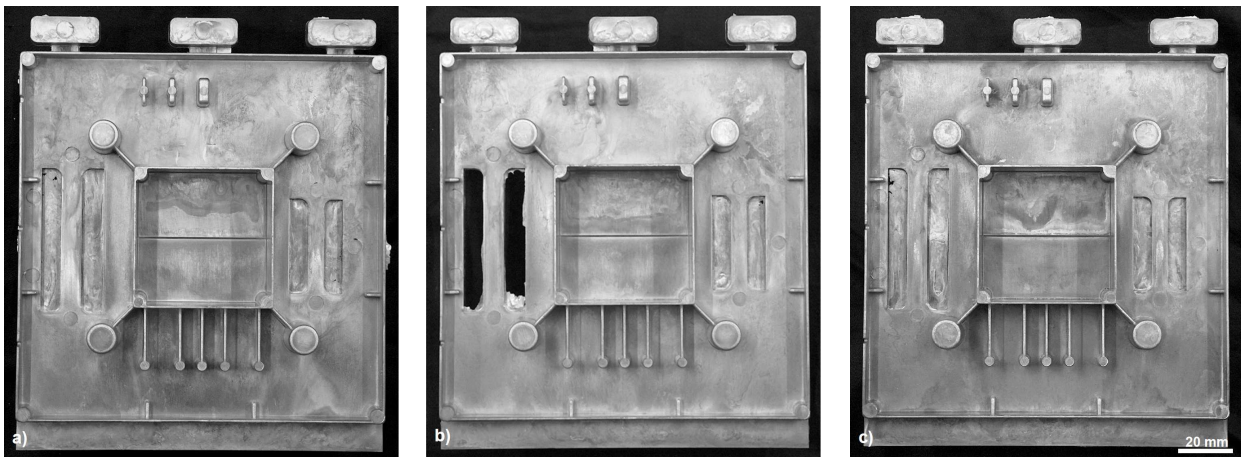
Examples of the best castings for (a) MRI153A (b) MRI153M and (c) MRI230D.
